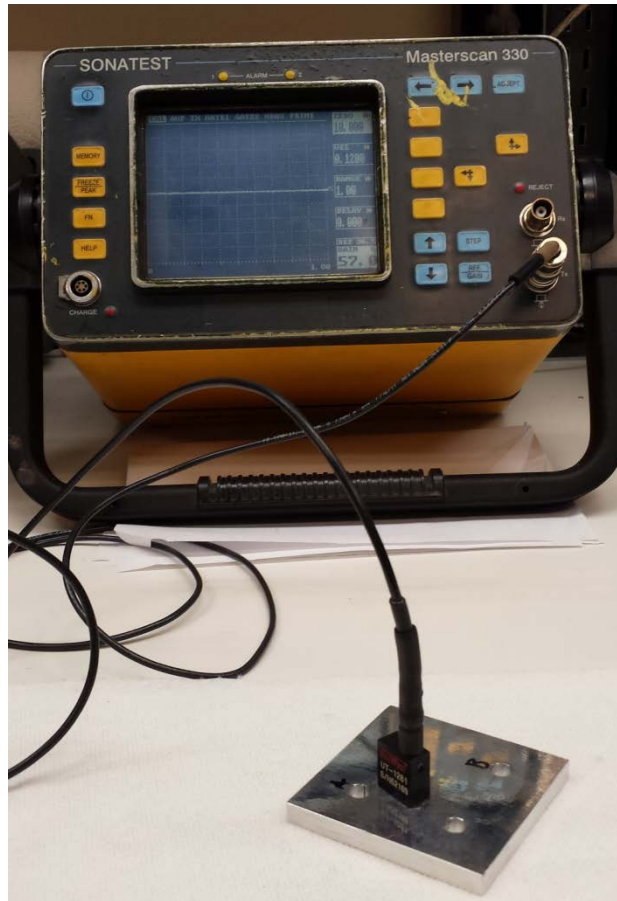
Equipment for the UT – Shear Wave inspection of cold worked hole specimens
